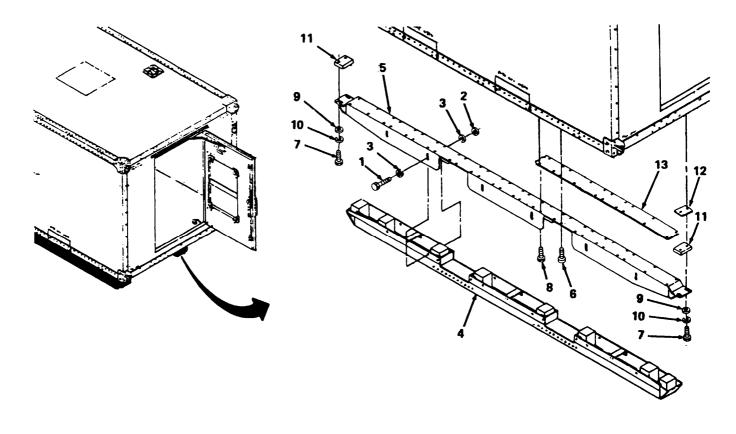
Skid Assembly and Mounting Bracket Replacement.
